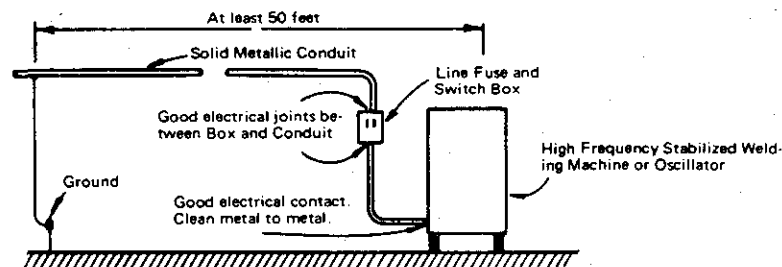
Figure A - Power Service Installation H. F. Stabilized Arc Welding Machine
